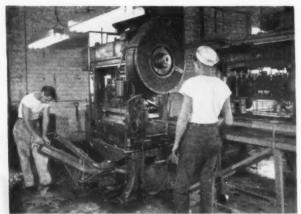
Two Bliss presses at high speed, automatically cut out rotor and stator laminations from steel coil feeds. The sequence of the five stage continuous operation is: 1) cut center, bore hole; 2) notch stator; 3) blank rotor; 4) notch rotor; 5) blank stator — then stacking them for easy removal.
